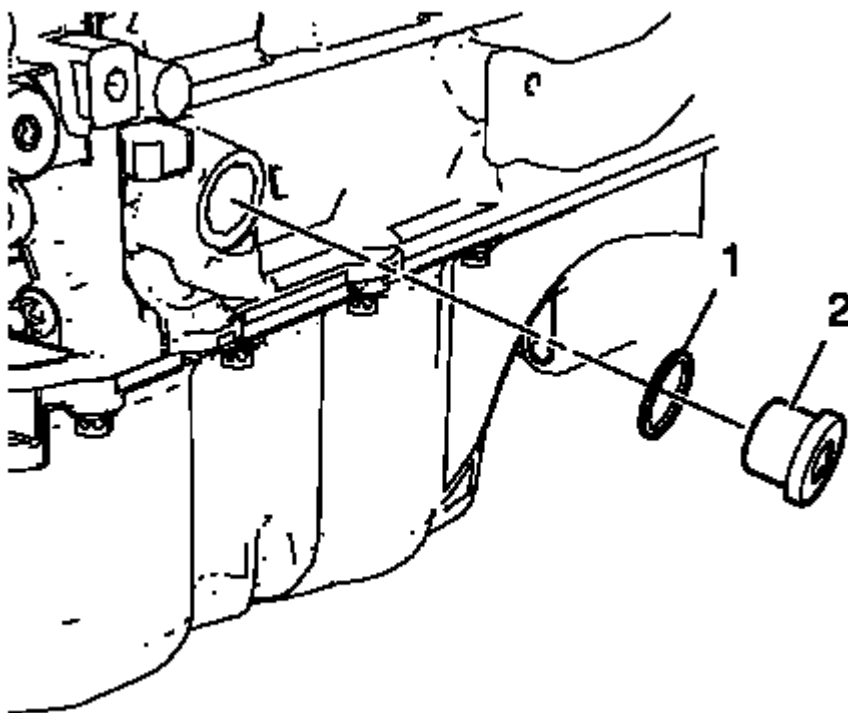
Crankshaft Bearing Cap Tie Plate Hole Plug And Seal Ring
